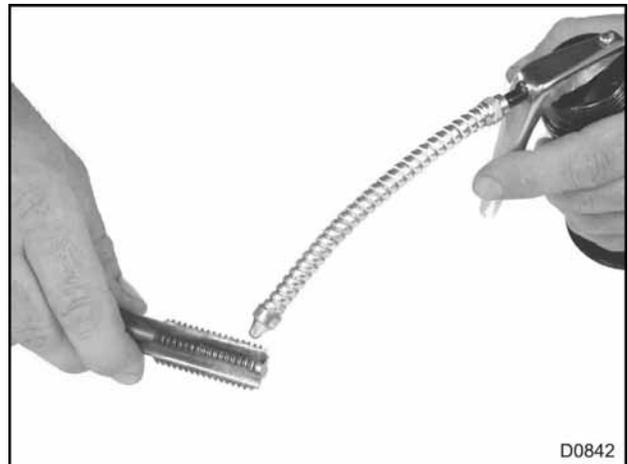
Lubrication of Injector Sleeve Remover (Thread tap)
